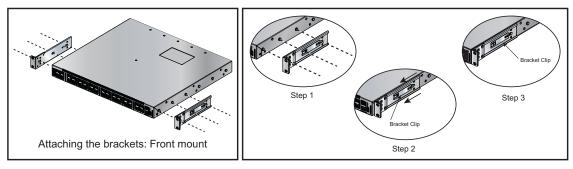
Attaching the Mounting Brackets to the Switch Chassis
